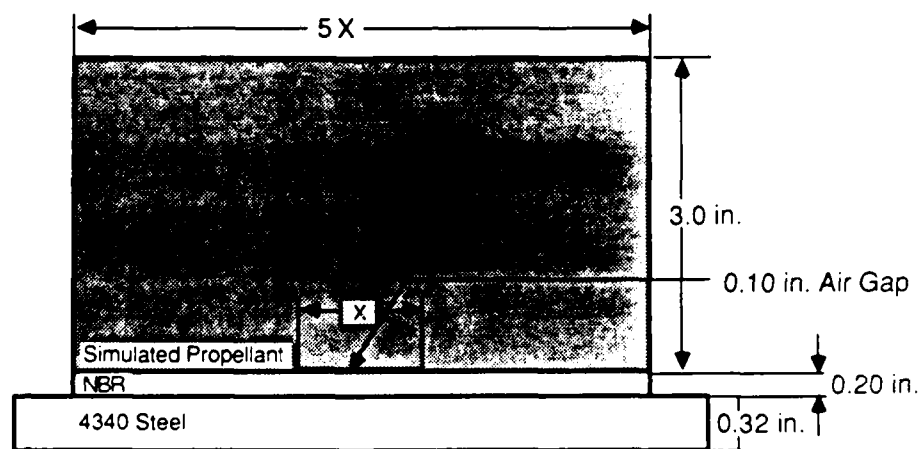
Schematic of Test Specimen Debond Sizes $x = 2.5, 3.0,$ and 3.5 in.
